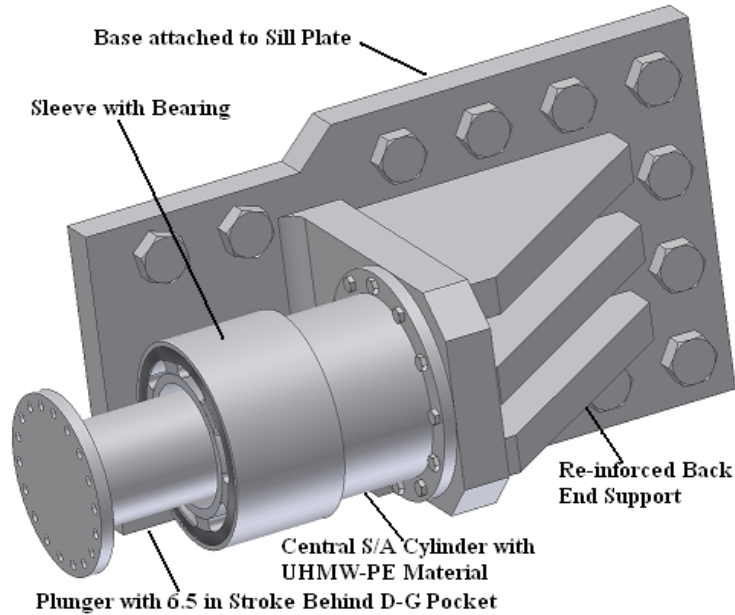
CAD Drawing of the Central SEA behind Draft Gear Pocket
